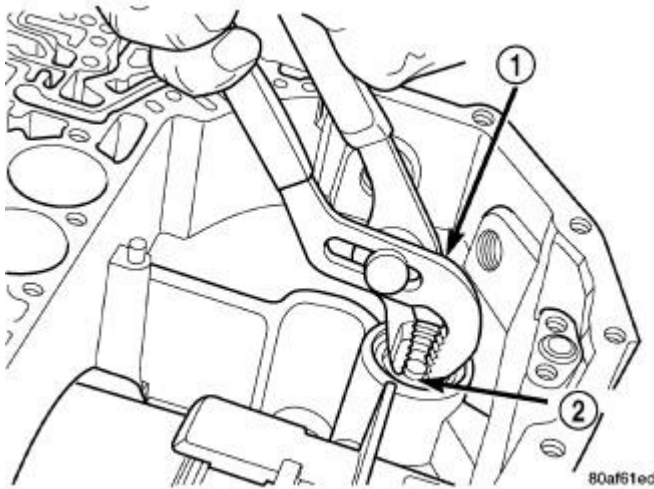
Remove/Install Low/Reverse Accumulator Plug
